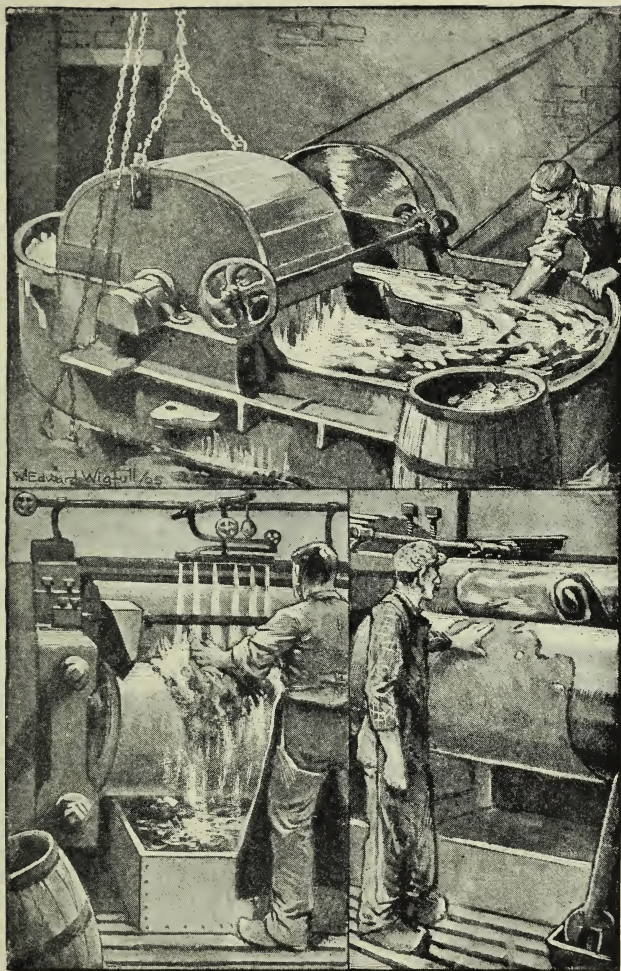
India-rubber Manufacture.—1. Washing-machine. 2. Three-roller washing-machine. 3. Grinding and mixing machine.
